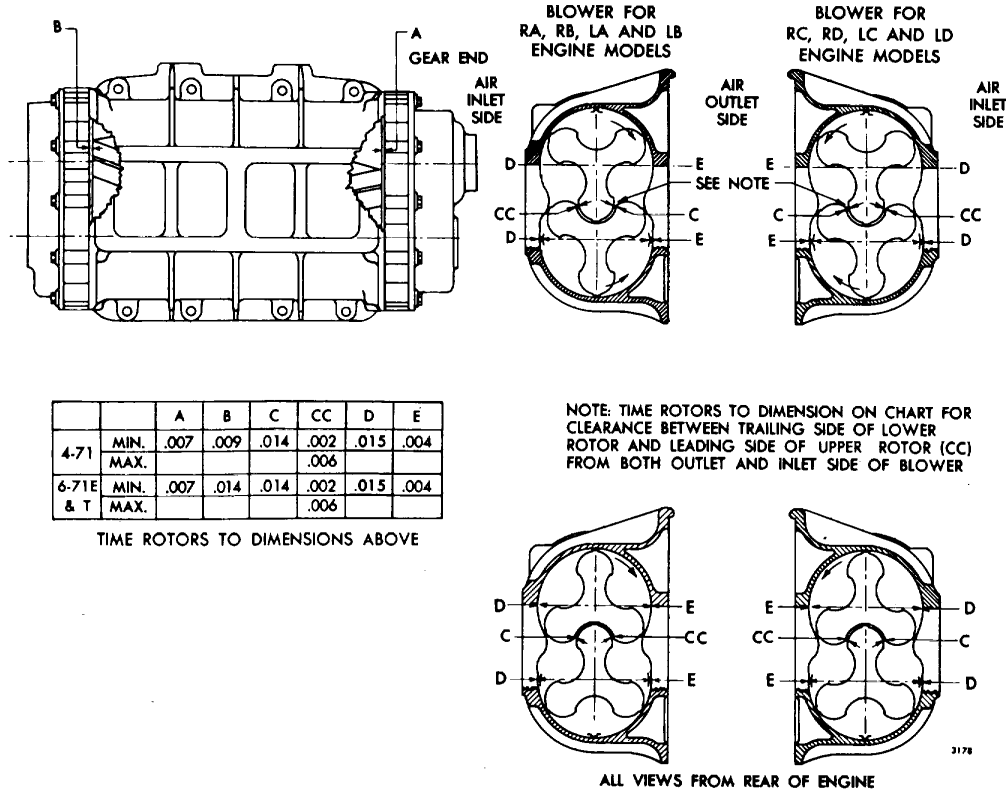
Chart of Minimum Clearances for Former Reduction Blowers
